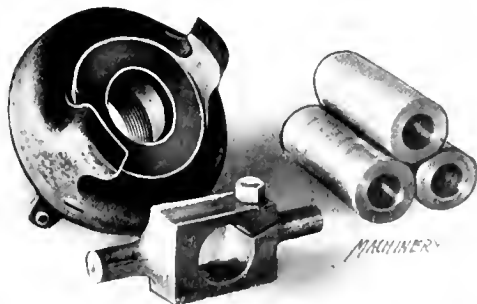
Special Holder and Two-tailed Driver for Boring in the Turret Lathe.
